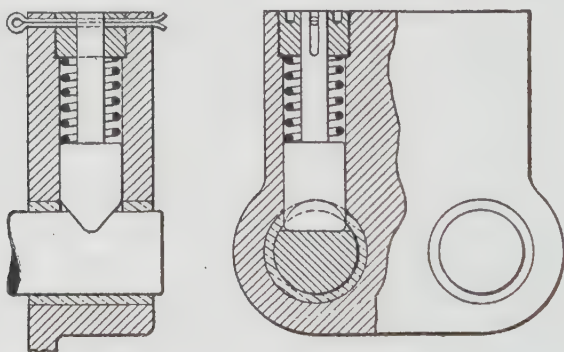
LOCKING DOG FOR GEAR SLIDER.
